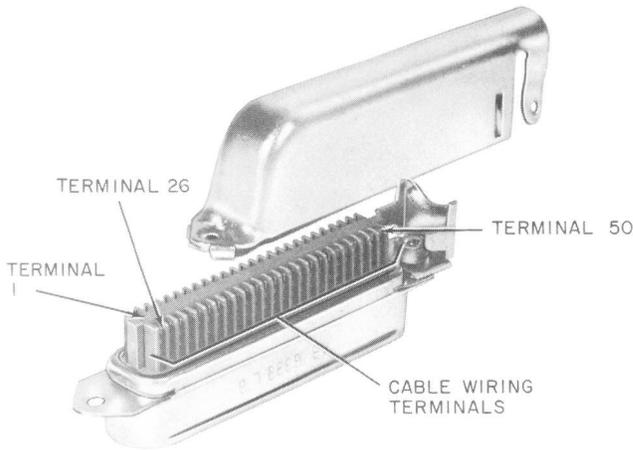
KS-16690, L12 Receptacle, Hood Removed
